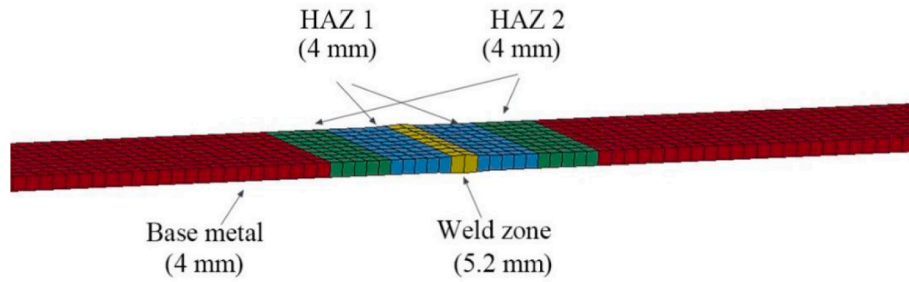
Details of the modelling in the vicinity of the weld.
